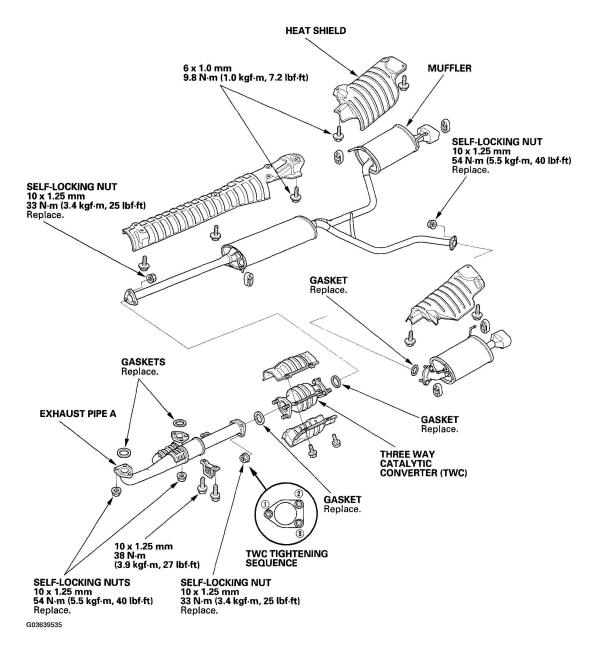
Exploded View Of Exhaust Pipe And Muffler (2004-2006 Models) Courtesy of AMERICAN HONDA MOTOR CO., INC.
